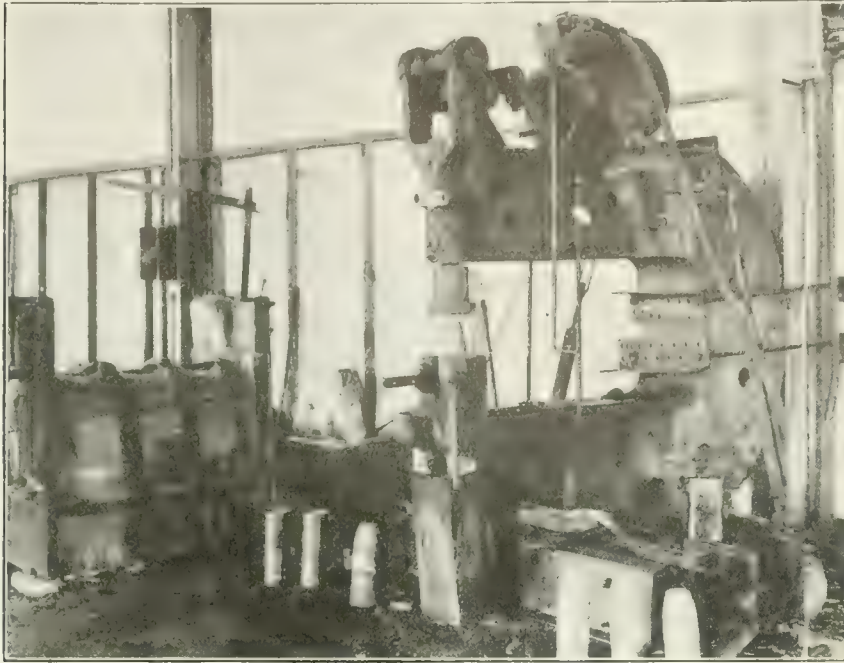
PNEUMATIC RIVETER USED FOR NOSING 4.5 INCH H. E. SHELLS.
